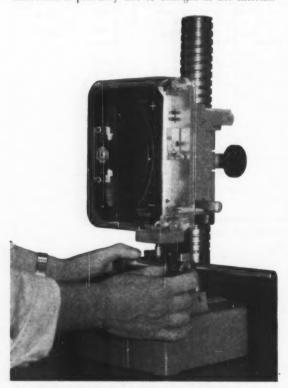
Measuring instrument fitted with back-stop used to inspect parts whose manufacture is described in the Paper.
